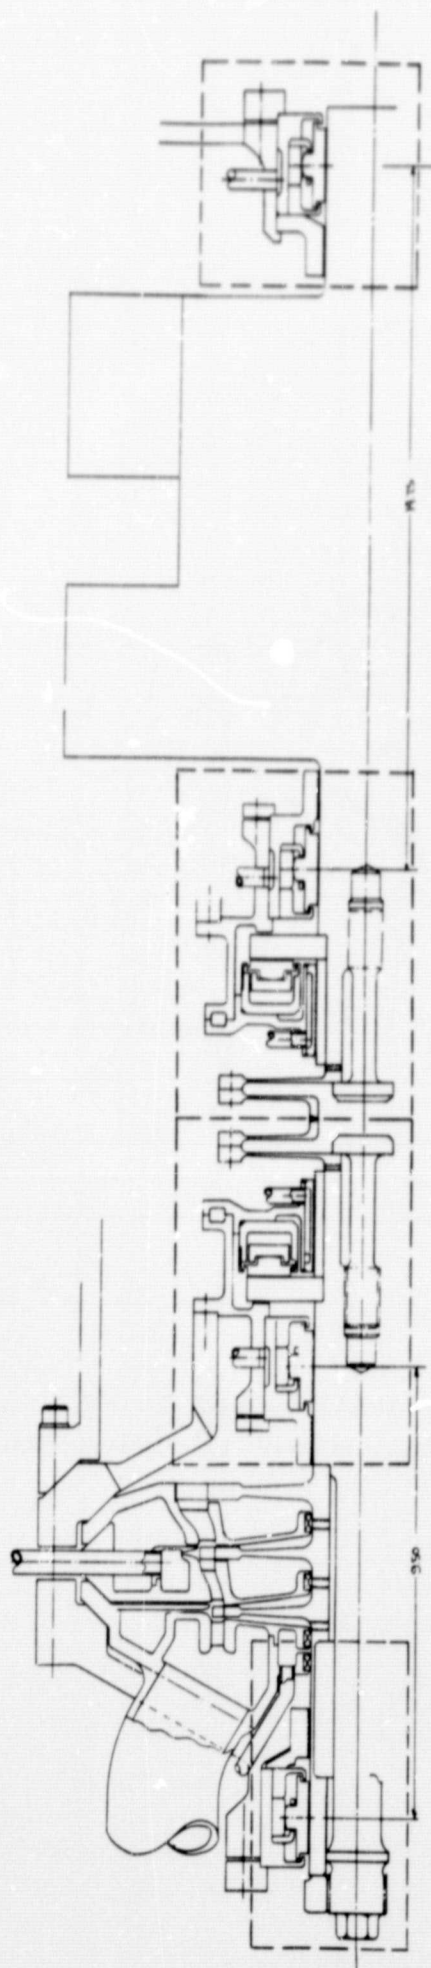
Bearing Layout Evolved by MTI for the Two-Bearing Turbine-Generator Reference Design Units. (Drawing excerpted from Ref. 21)
